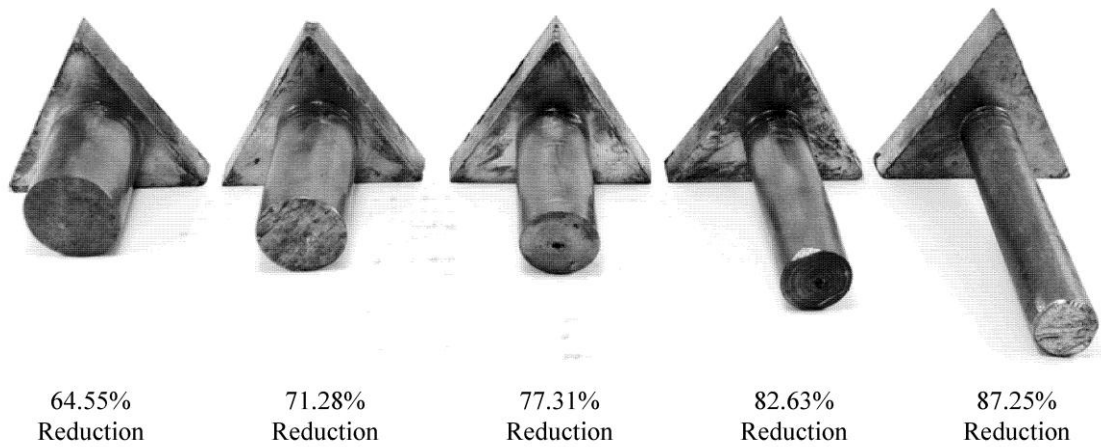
Extruded forward extrusion-forging triangular head shaped product
